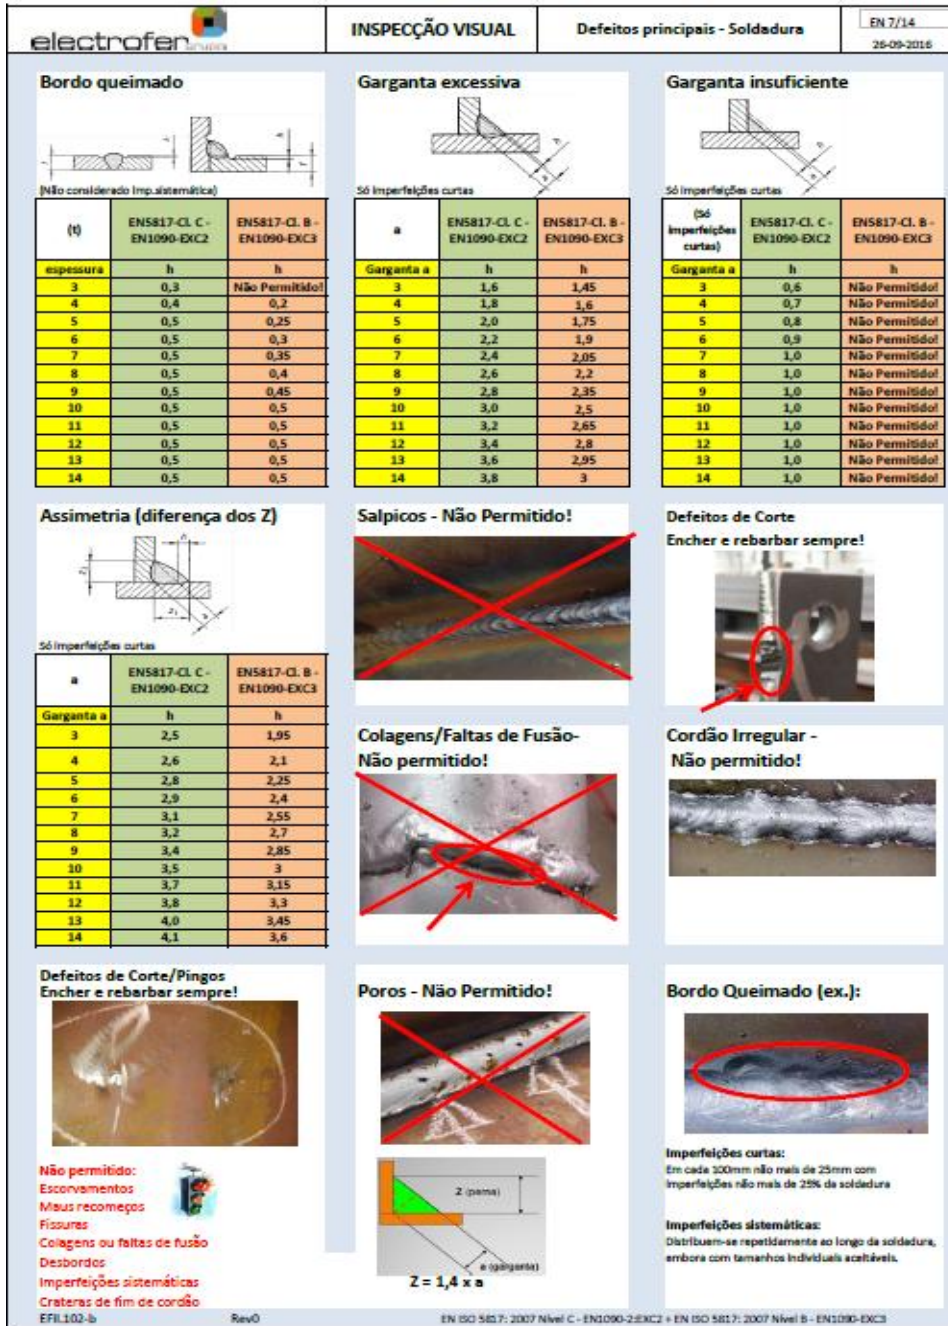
Visual inspection and major welding defects chart (Visual Inspection and Major defects- welding)
